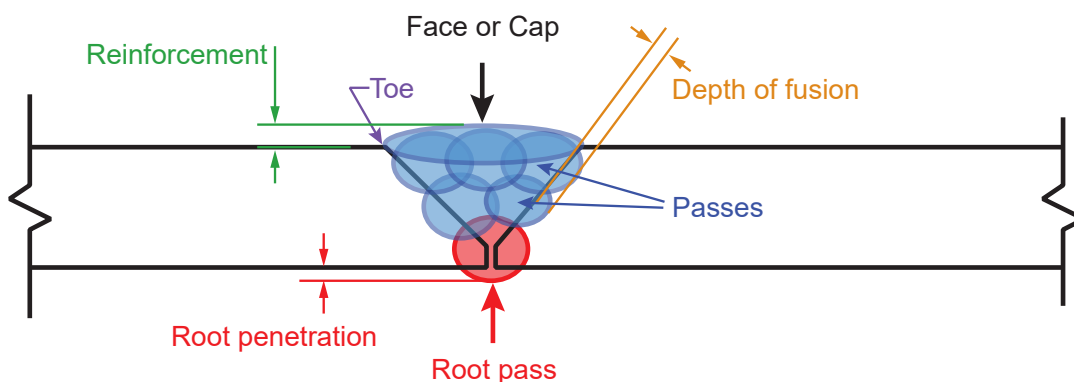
shows the details of a completed single-welded groove butt joint. The weld is a multi pass weld, meaning that the weld metal was deposited sequentially, layer after layer.
